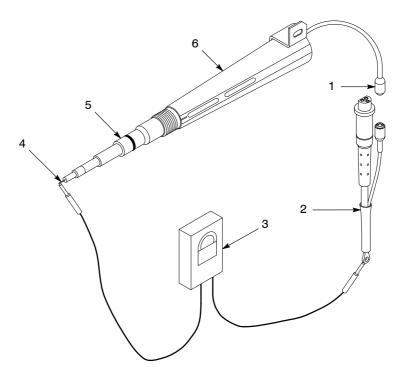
Multiplier/Resistor Assembly Resistance Check
